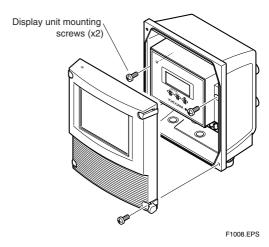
Removing the Front Cover and Mounting Screws of Display Unit
